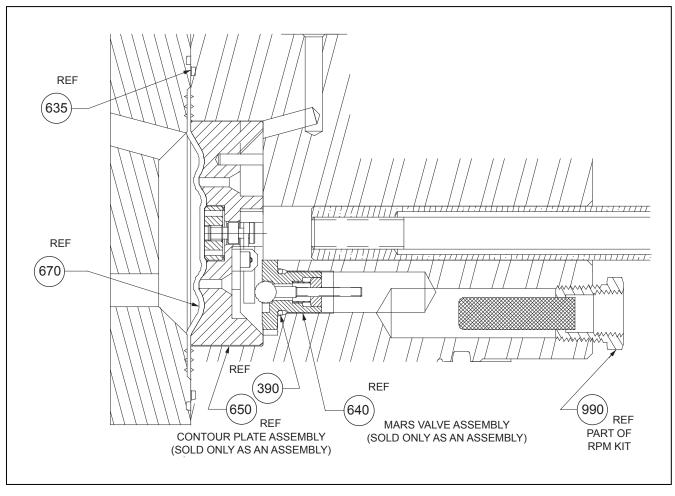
Milroyal[®] B HPD Low Flow Liquid End Assembly (102-2095-000 Sheet 10) (Sheet 1 of 2).
